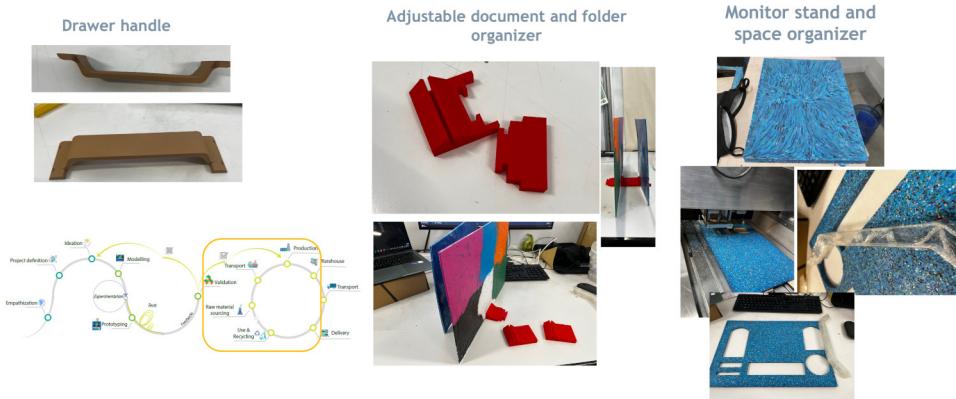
Manufacturing of the recycled parts (PC support, adjustable folder separation and drawer handler)
